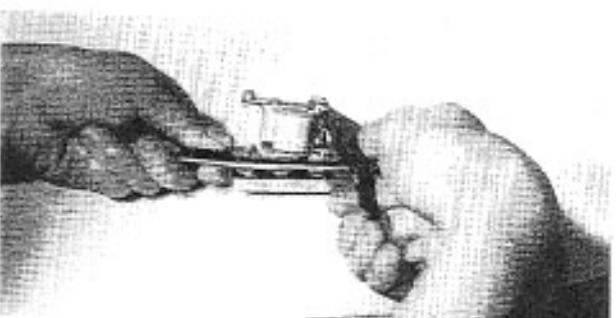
Bending the adjusting arm to adjust the charging rate
